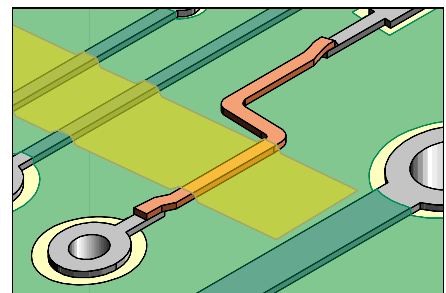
Form the final shape of the Circuit Track then hold in place with tape while soldering.
